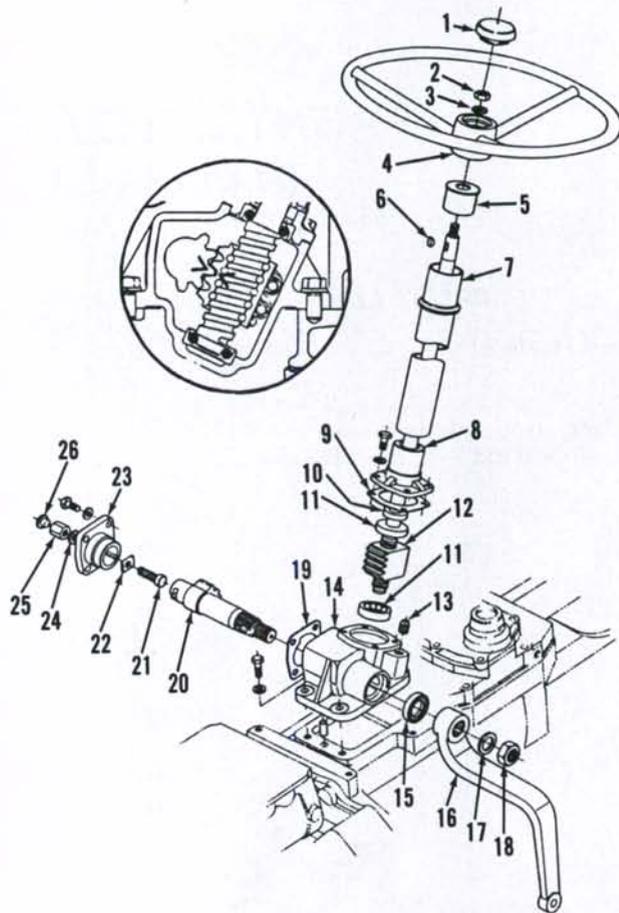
Exploded view of recirculating ball nut steering used on Models L175, L225 and L225DT. Although details may differ, steering used on Models L210 and L260 is basically similar. During reassembly, align marks on sector shaft teeth (20) and worm gear (12) as shown in inset.
